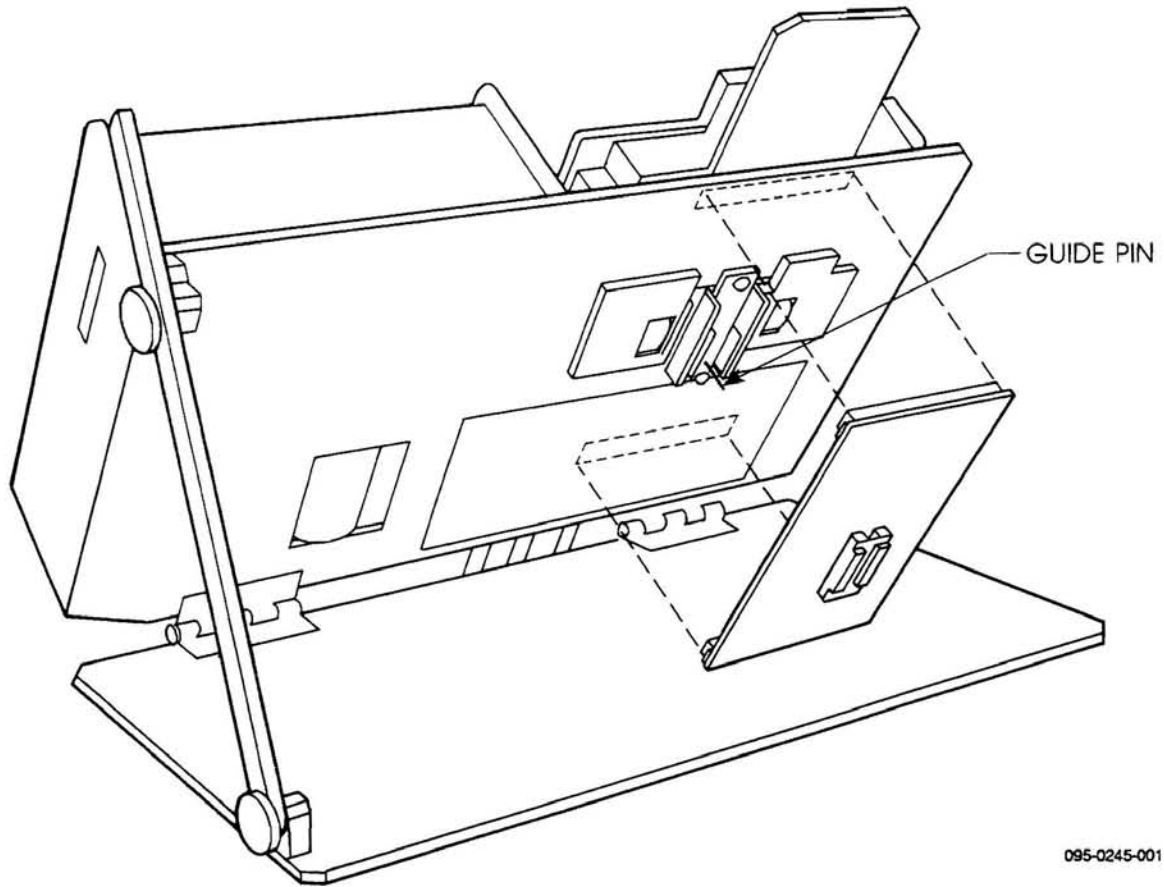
Mounting the Velcro Strips on the Exatron Handler
